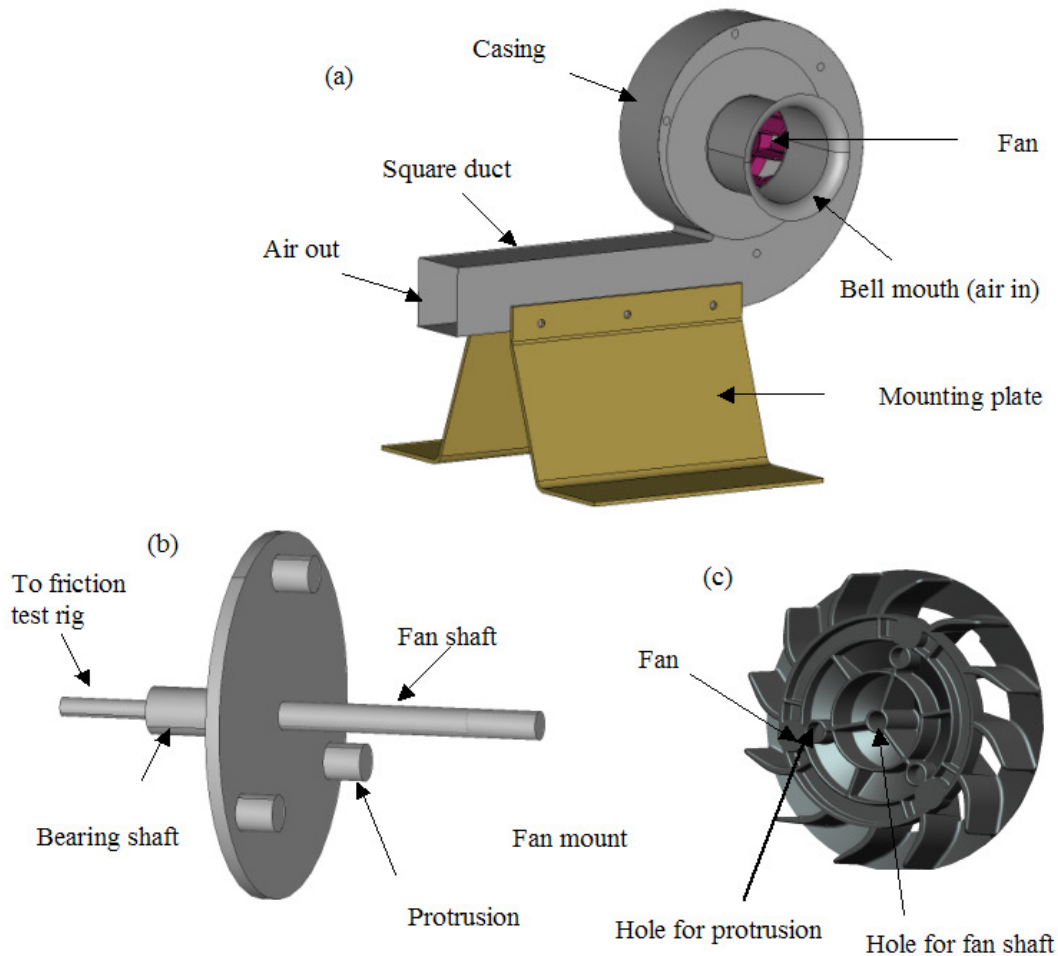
(a). CAD model for the experimental setup (b) mounting shaft for fan and (c) fan.
